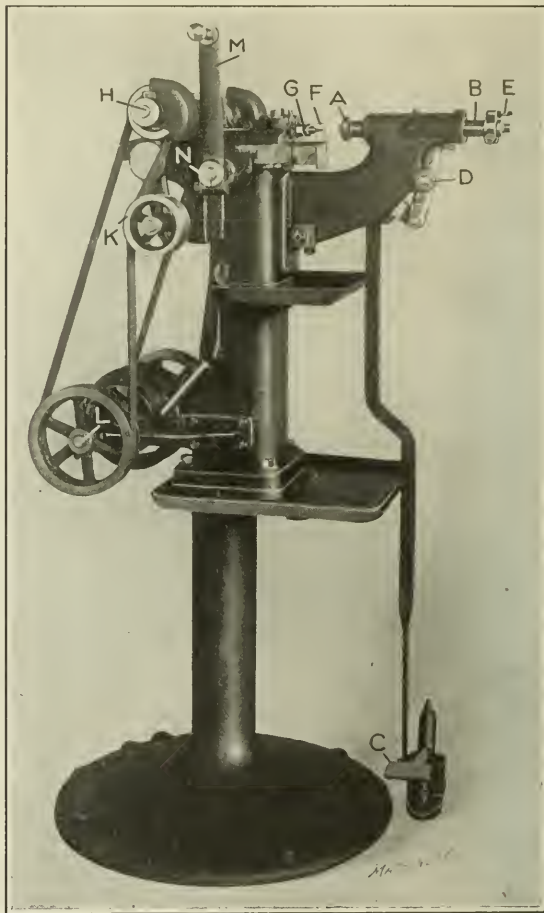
Special Duplex Milling Machine for Wrench Slots in Closing Cap
